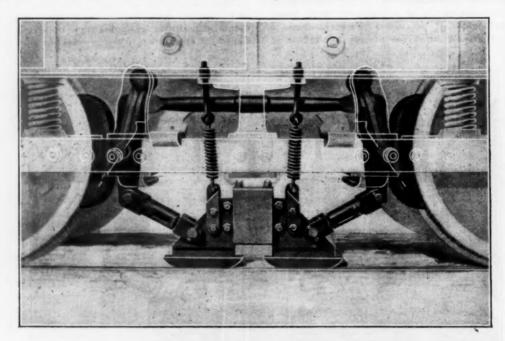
View Showing Method of Attaching Brake to Car Frame and Trucks.
